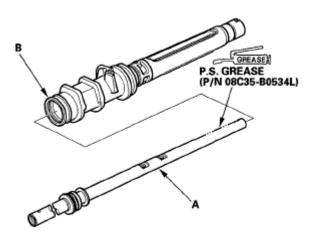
Inserting Steering Rack Into Cylinder Courtesy of AMERICAN HONDA MOTOR CO., INC.
